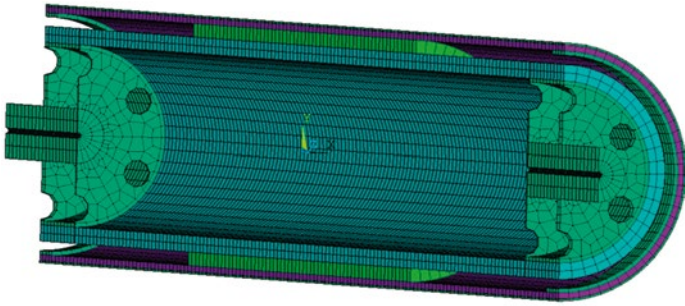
Previous design with the seal being a clear weak point. Due to limited space between inner and outer core
